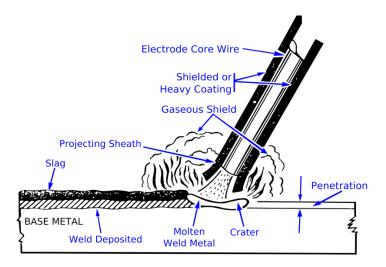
Shielded metal arc welding weld area [4]
